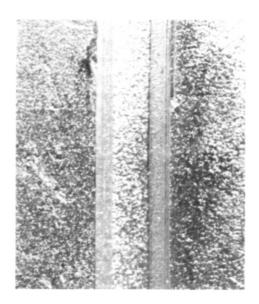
E-139 Bomblet Assembled for Welding
